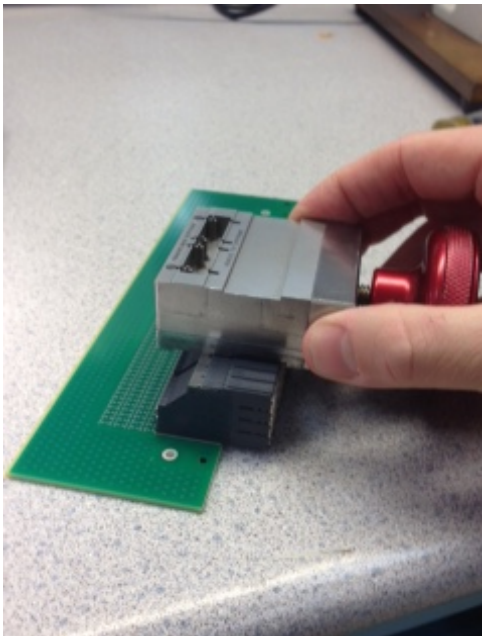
Top stiffener installation on Paladin RAF connectors pressed into a board
